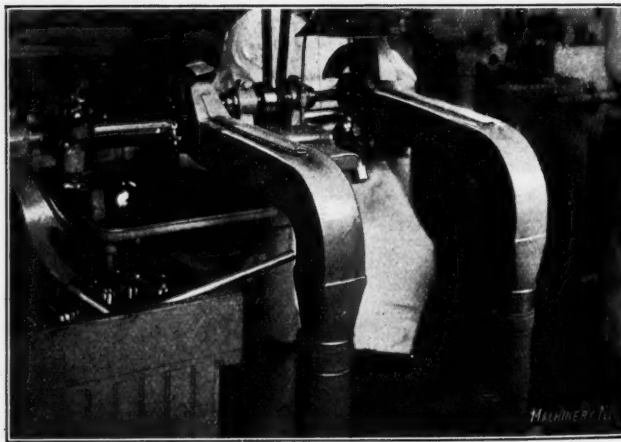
Dust Pipes and Wheel Guards on Universal Grinder
